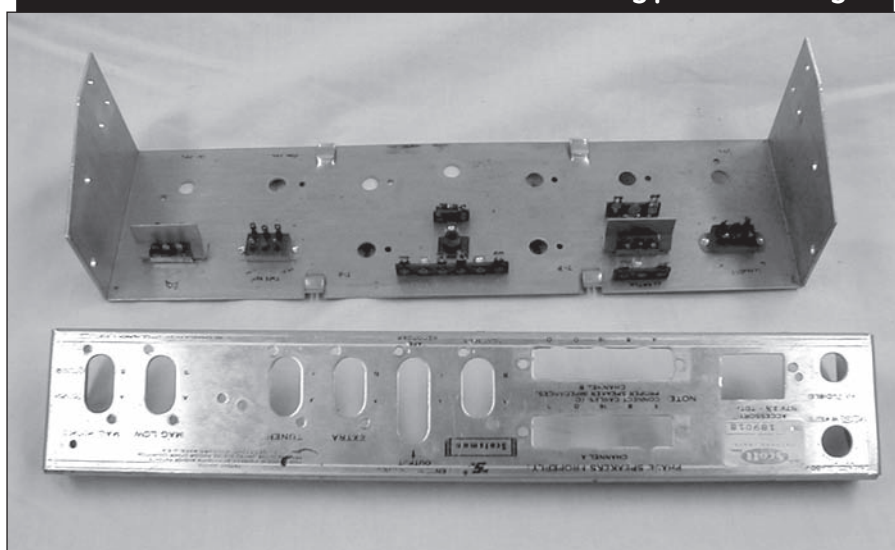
Front and rear sub-chassis after removing parts and wiring.
